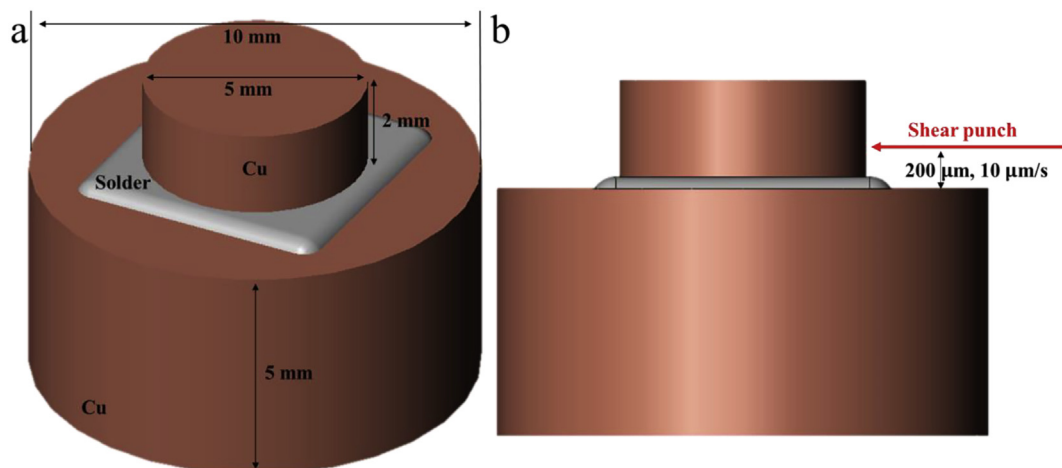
(a) Dimensions of the Cu/CS-190/Cu joint and (b) test condition of the shear test.
